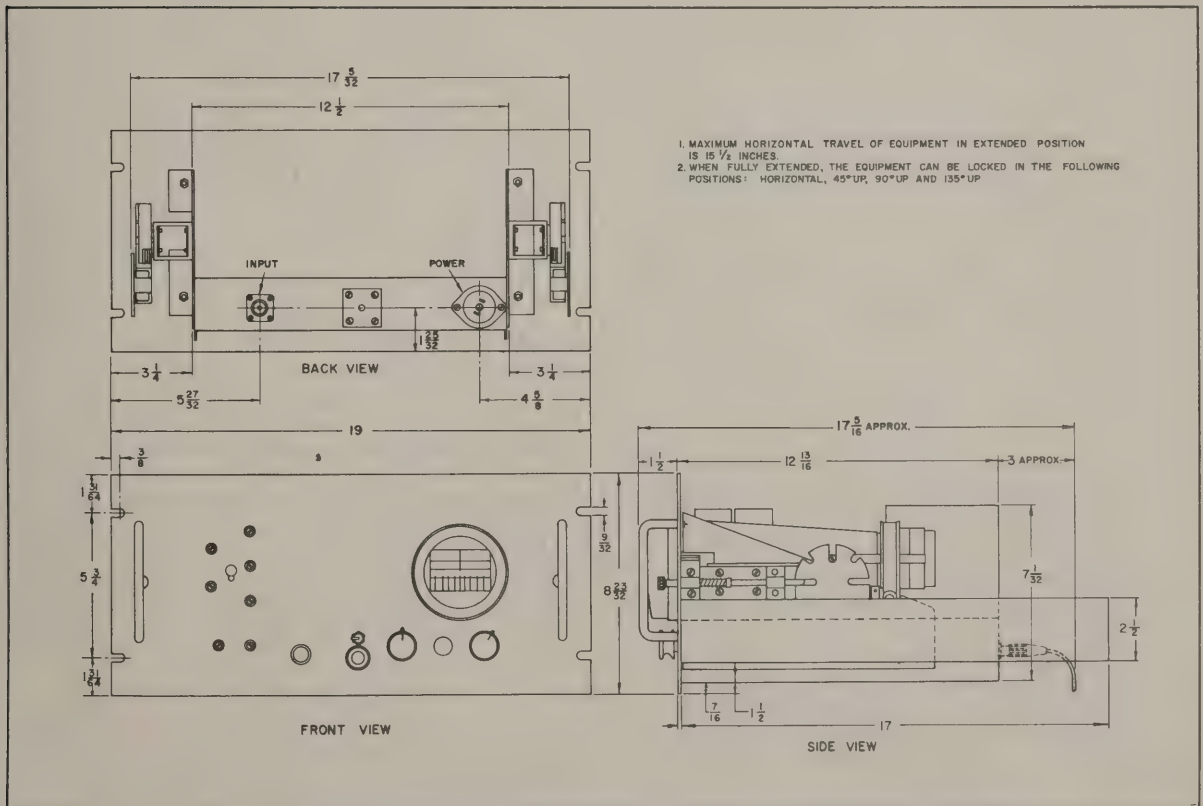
Outline Dimensional Drawing, Model SA-3, Type T-2000NC, Rack Mounted with Slides.
